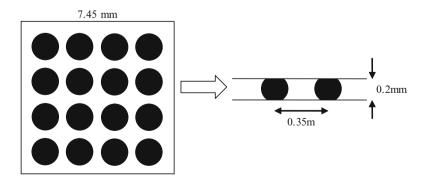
Ceramic substrate and the eutectic solder balls on PCB (not drawn to scale)
